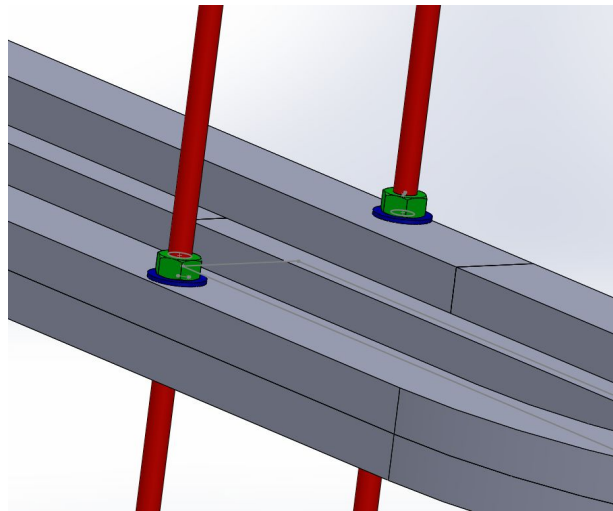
Flat washer and nut clamping on top and bottom clamping track pieces.
